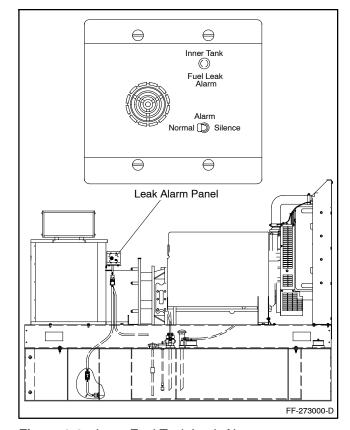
Inner Fuel Tank Leak Alarm (20–300 kW Model Shown)
